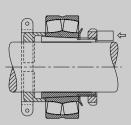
Dismounting of Adapter Sleeve by using Stop Nuts
